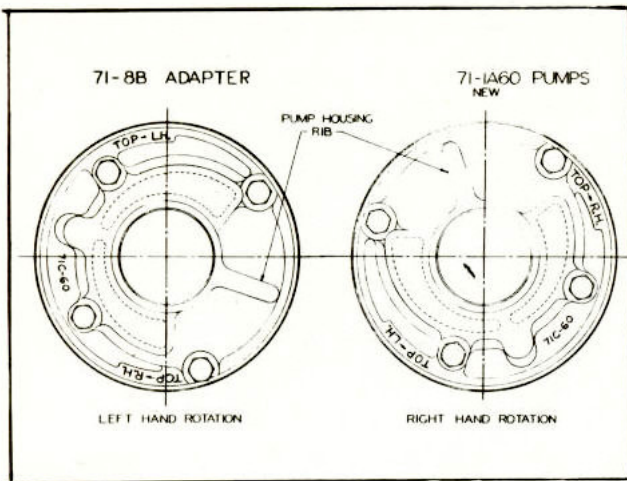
Orientation Markings for New 71-1A60 Pump Assembly on 71-8B Adapter
